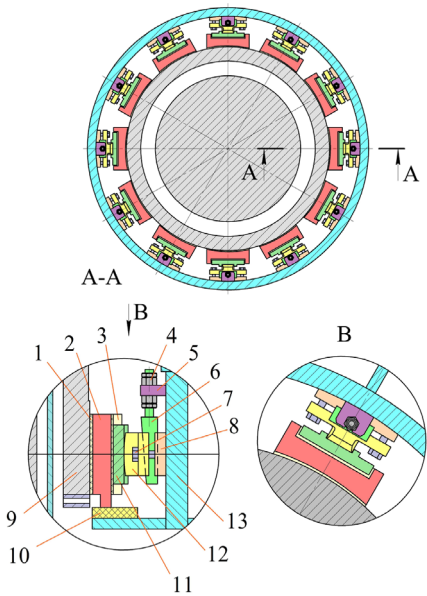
Guide bearing: 1 – fluoroplastic layer of the bearing segment; 2 – bearing segment; 3 – insulating plate; 4 – nut; 5 – wedge holder; 6 – adjusting wedge; 7 – bolt; 8 – external support; 9 – bearing sleeve; 10 – insulating support shelf; 11 – rusk; 12 – support plate; 13 – support ring of the cross (bearing housing)
